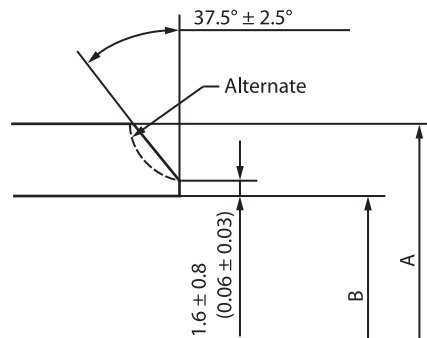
ASME B16.25 – weld bevel details for GTAW Root Pass with wall thickness from 3 mm up to 10 mm
